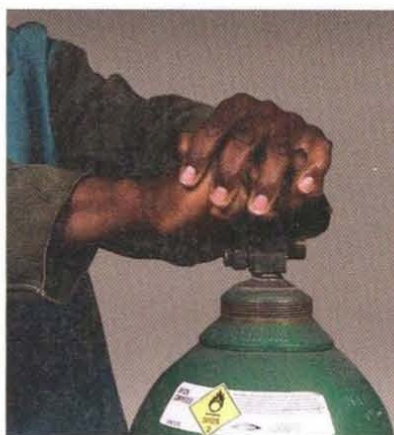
The welding apparatus must be properly assembled to ensure proper and safe operation during welding.
